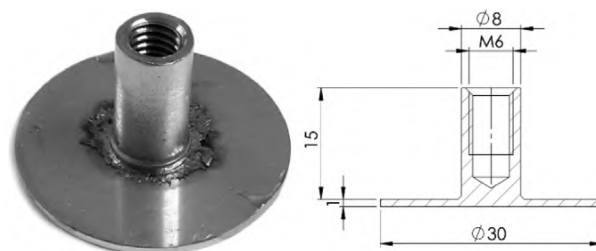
Exemplary picture and dimensions of the metal insert used (c.f. [1,9,26]).
